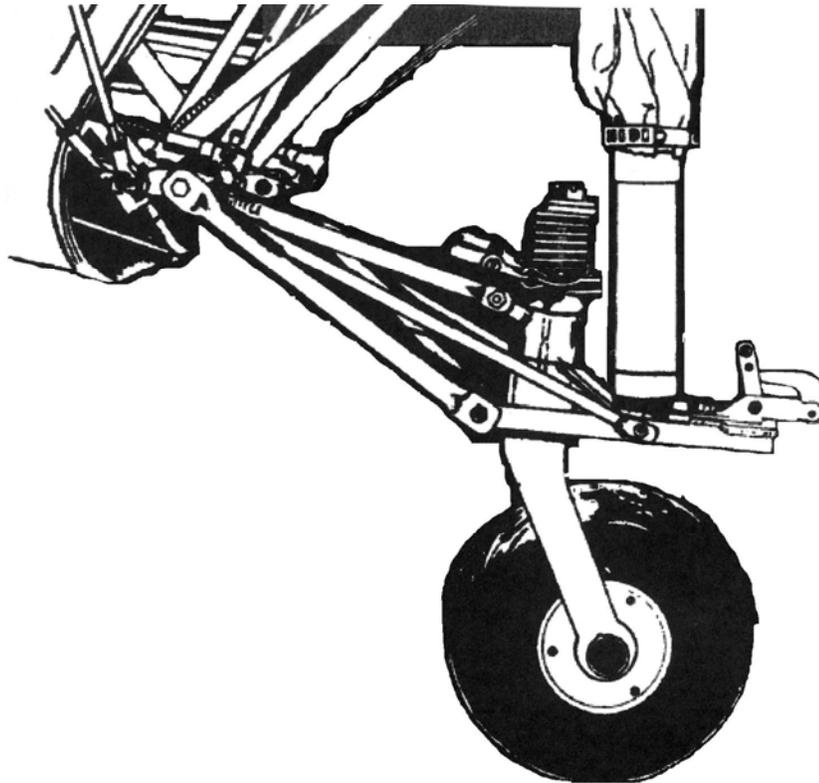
CONVENTIONAL GEAR AIRCRAFT – TUBULAR SPRING TYPE TAILWHEEL
